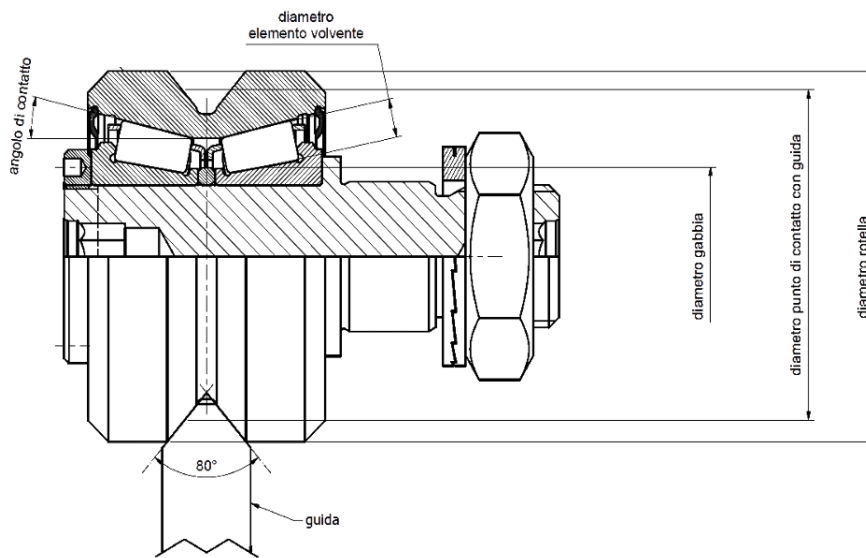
Mechanical Drawing of NADELLA RKY52 bearing
